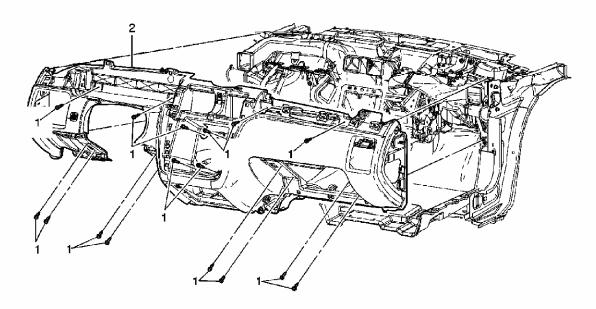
View Of Lower Instrument Panel (I/P) Trim Panel Courtesy of GENERAL MOTORS CORP.
